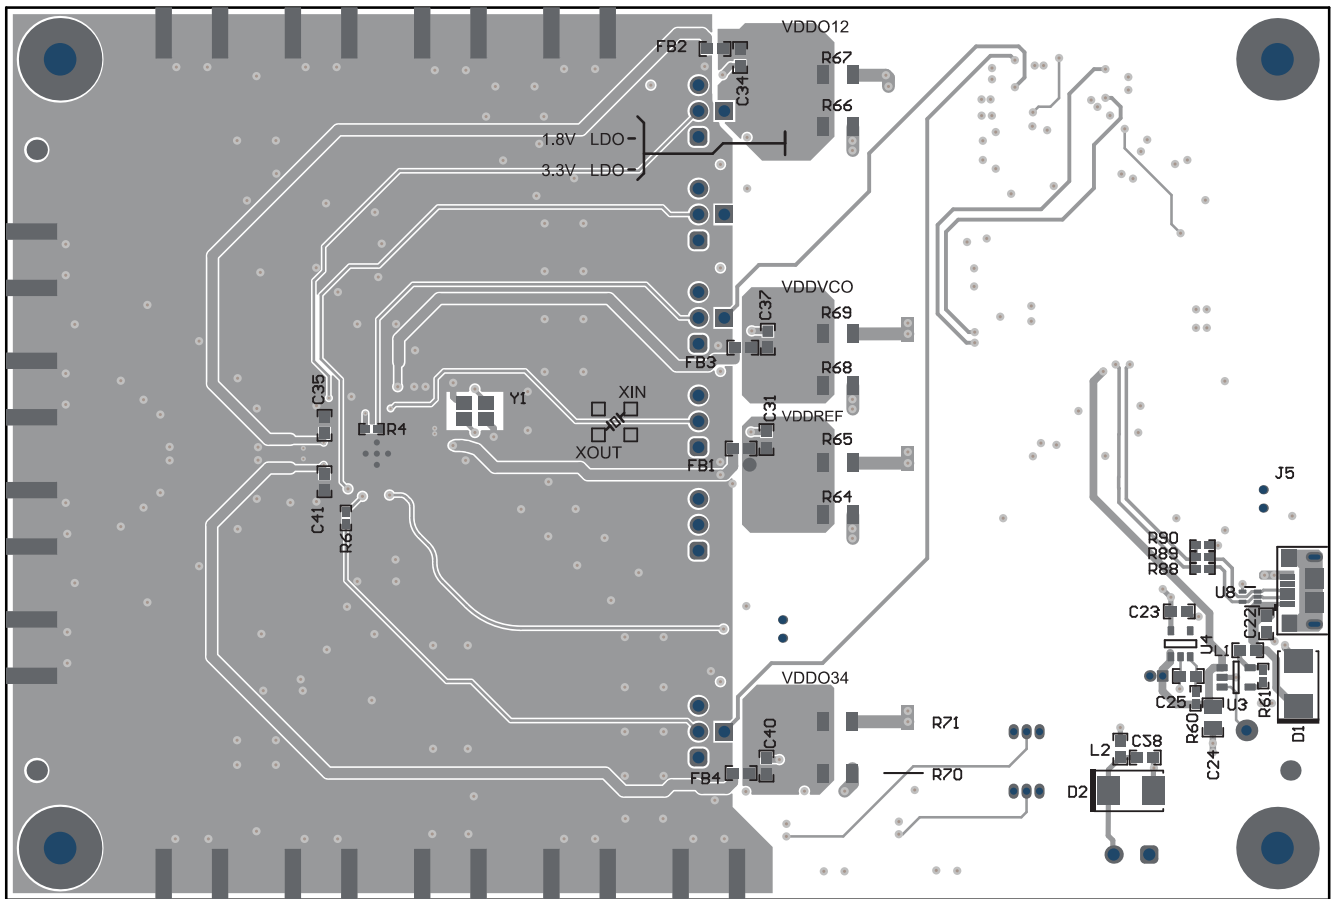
PCB Layer 4: Bottom Layer Composite
